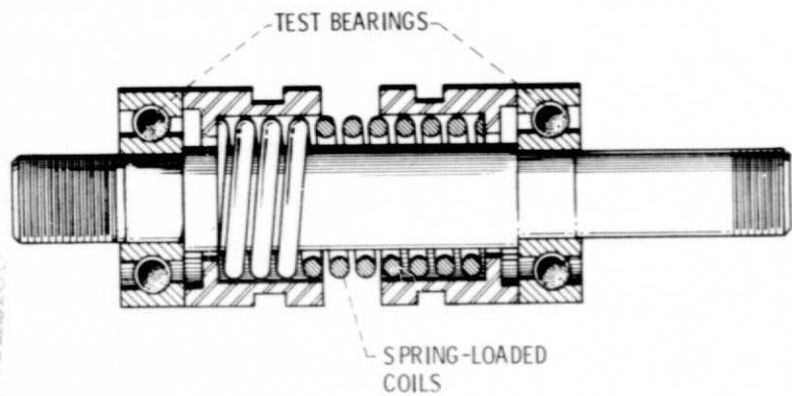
Schematic of vacuum bearing endurance assembly.
